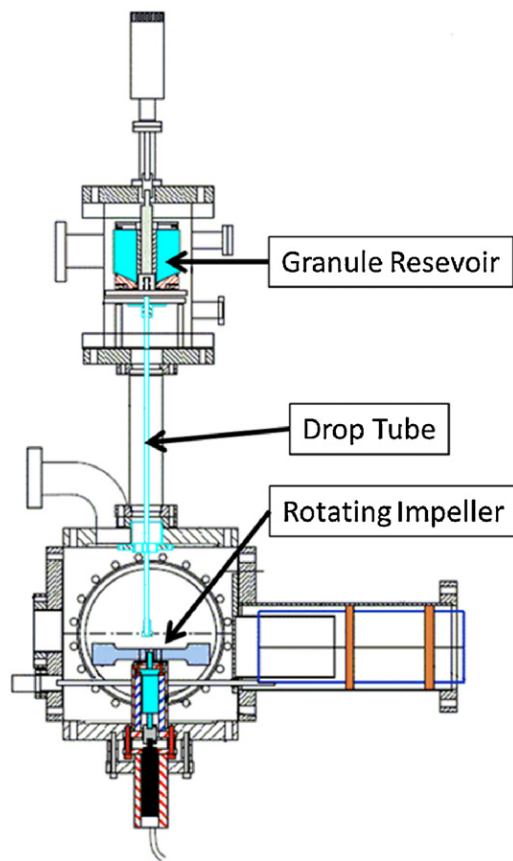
Assembly drawing of the lithium Granule Injector (LGI) showing the principal working components.
